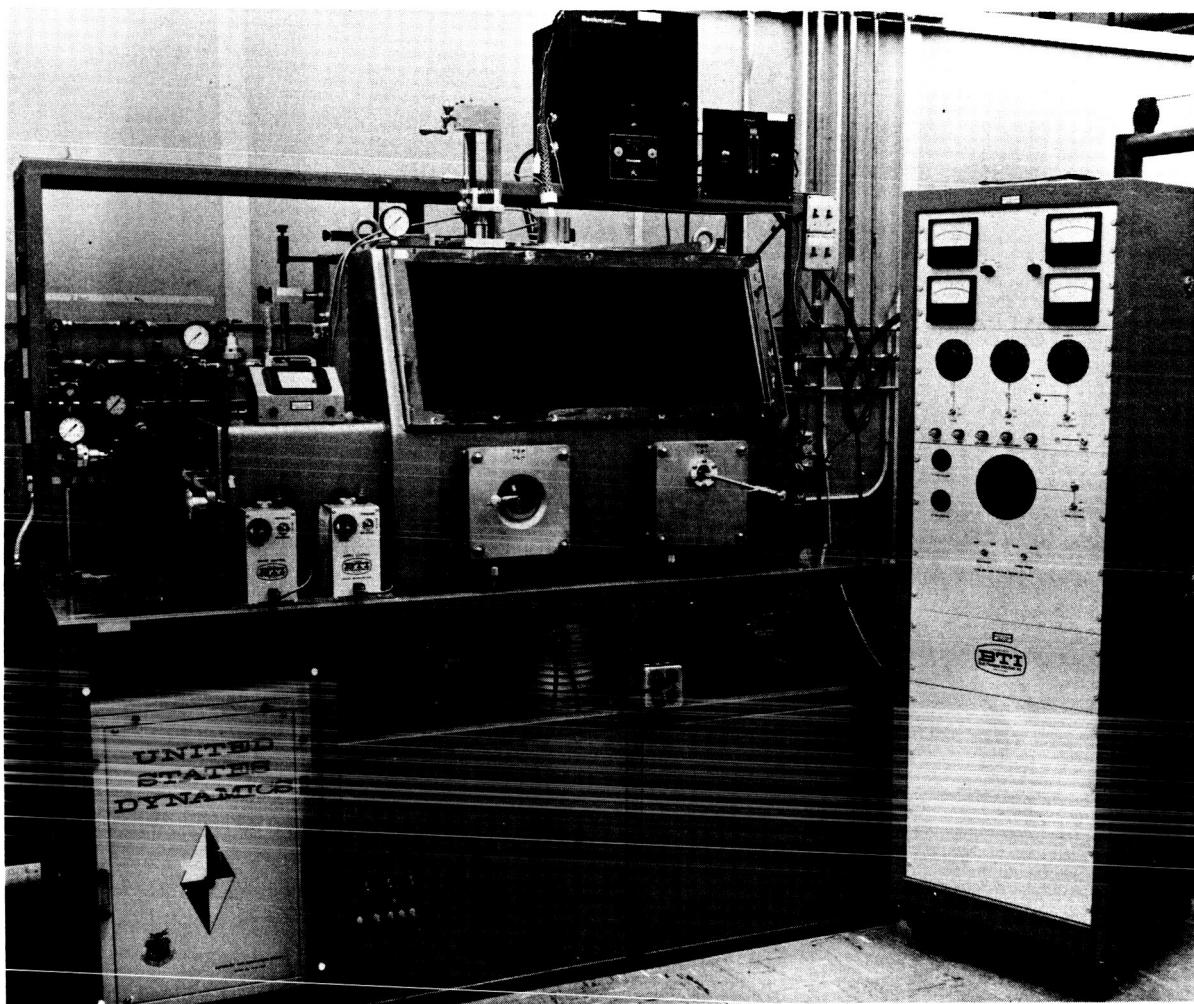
Vacuum Chamber and Power Supply For Capsule Loading and Welding
